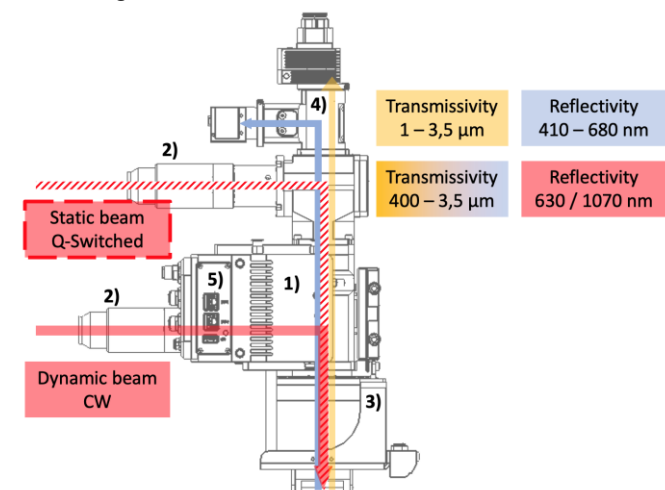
Dual laser welding head optical setup. 1) Scanner module, 2) Beam bender module, 3) Focusing module, 4) Camera module, 5) SdLED control card.
